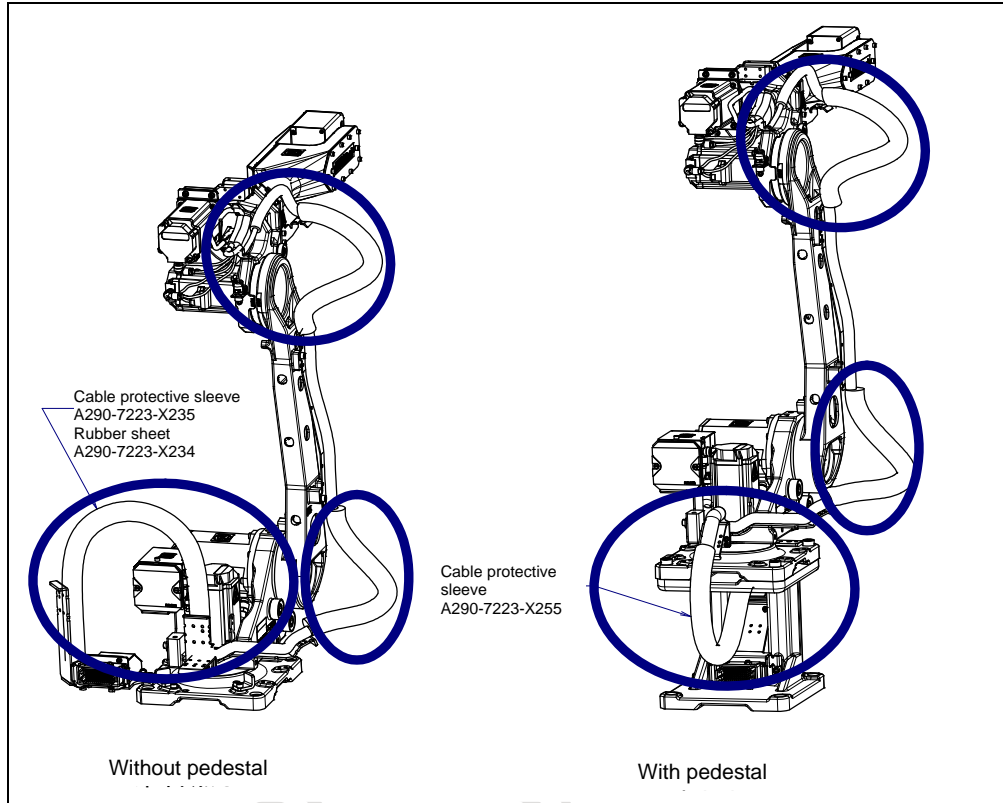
(a) Inspection points of the mechanical unit cables
